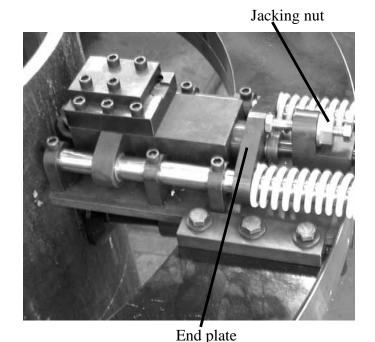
Turn the slide jacking nut to retract the end plate all the way back (fully compressing the springs). After fully retracting, turn the nut back one turn.
